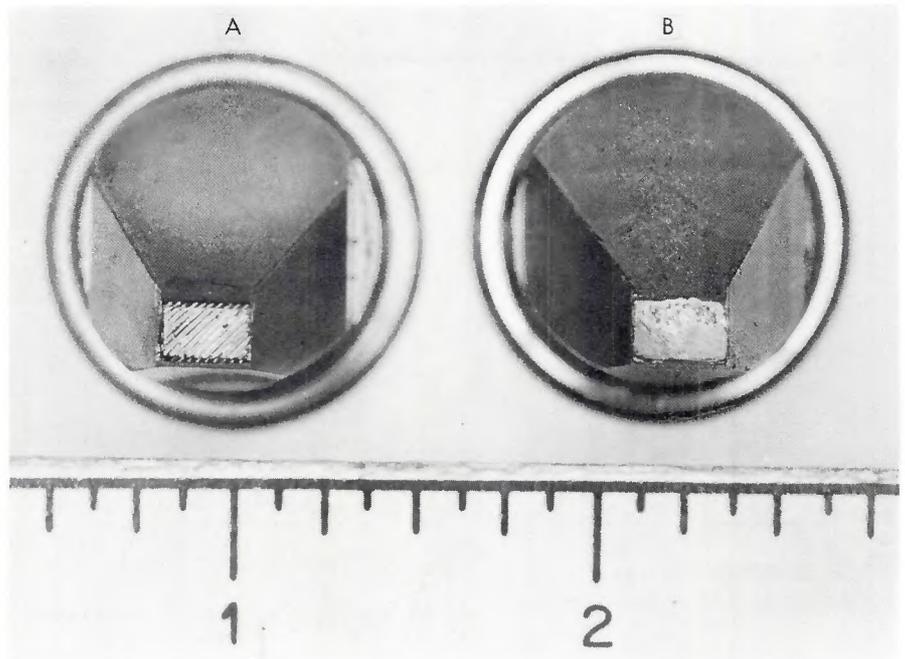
New and worn ultrasonic tube welding tips
